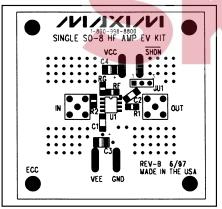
SO-8 High-Speed EV Board Component Placement Guide— Component Side
